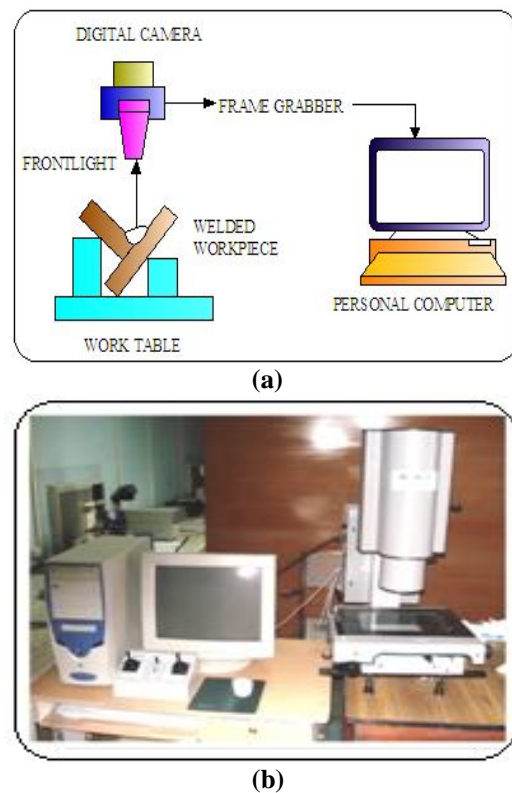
(a) Schematic diagram of Machine Vision System for MIG Welding Inspection
